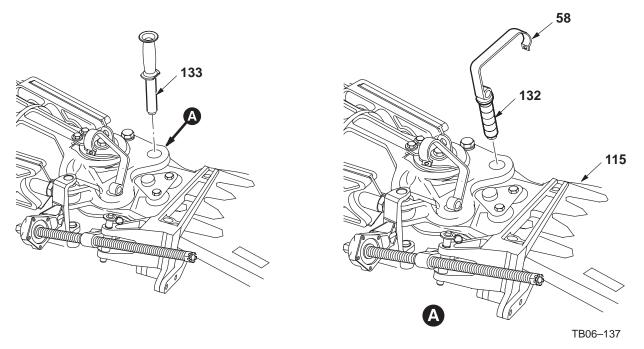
Install Identified Aircraft Blade Pin on Leading Edge Side of Blade
